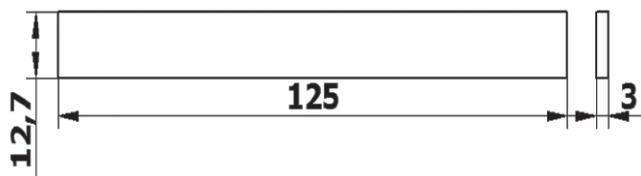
Diagram of flexural specimen. All dimensions are in mm
